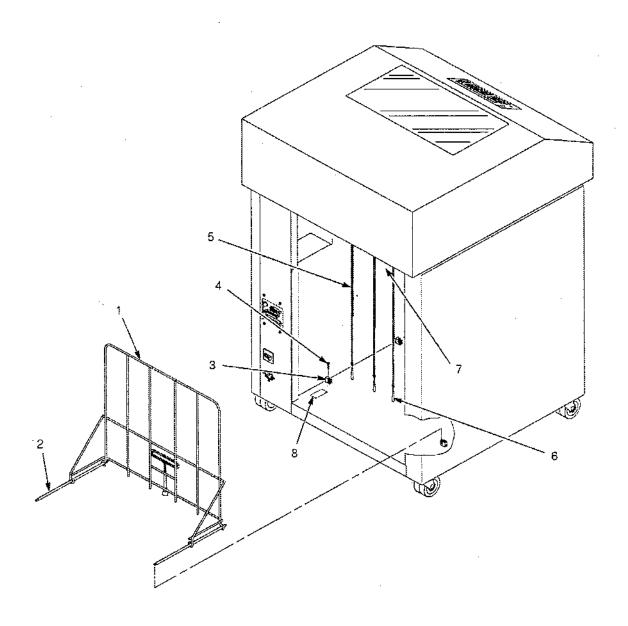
Paper Stacker Tray Assembly and Paper Chains
